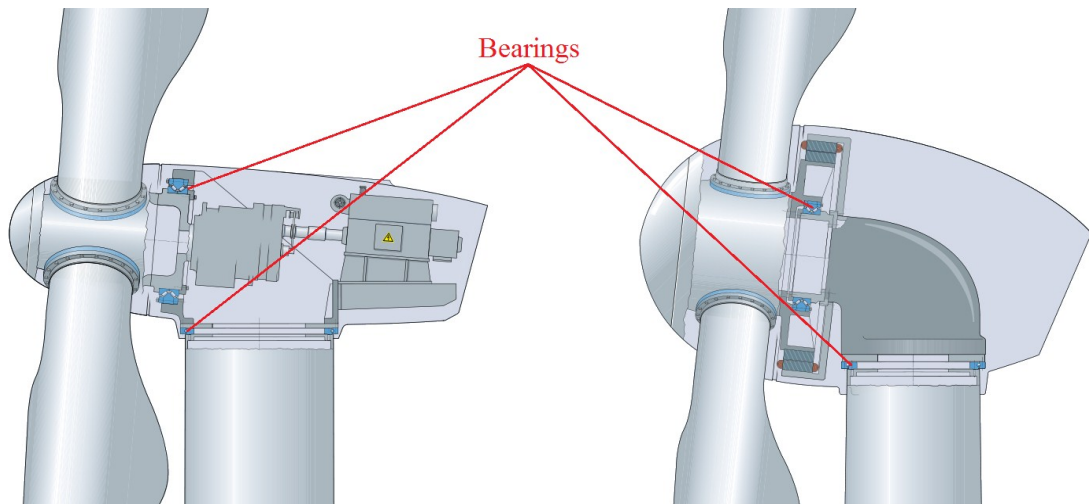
Nautilus bearing: single bearing design for geared (left) and direct-drive (right) topologies for wind turbines [60]
